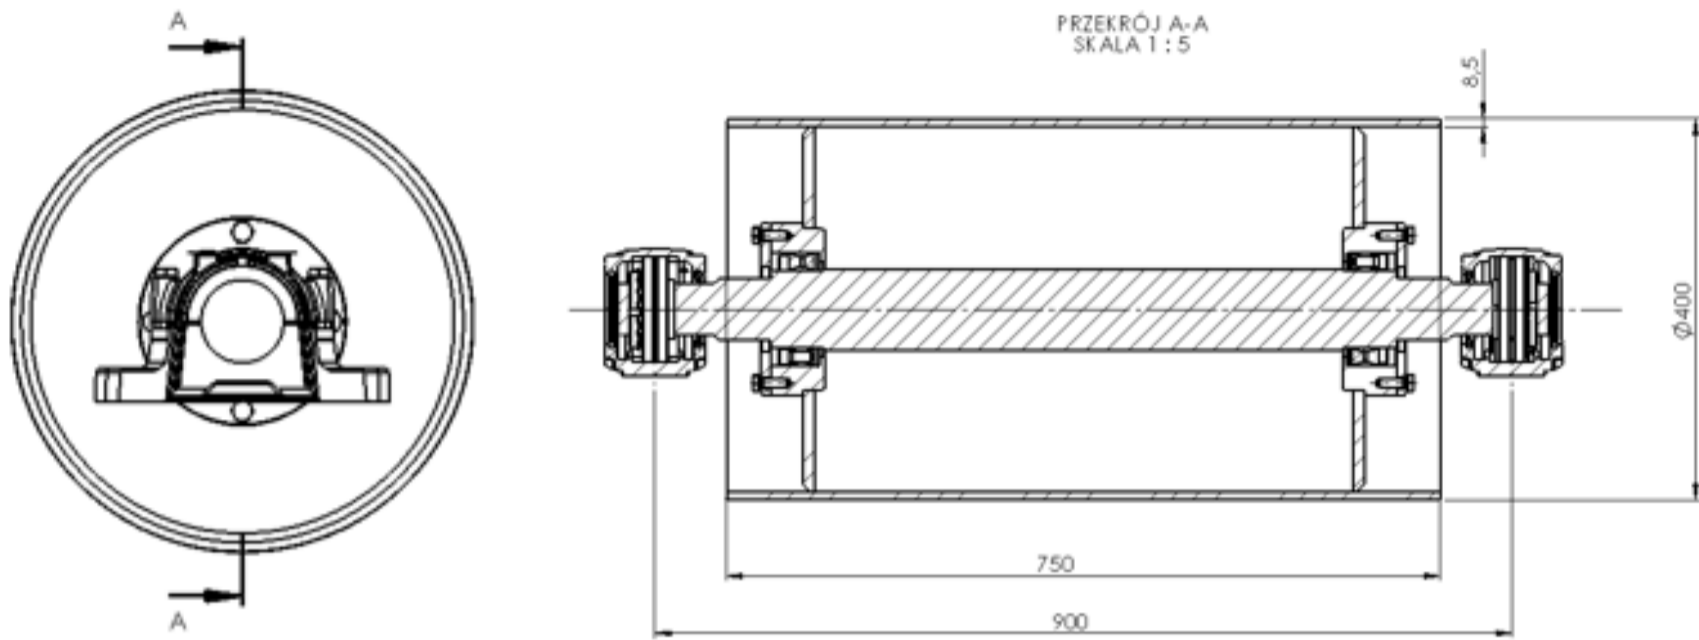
Example installation — return (tail) pulley — technical assembly drawing.
